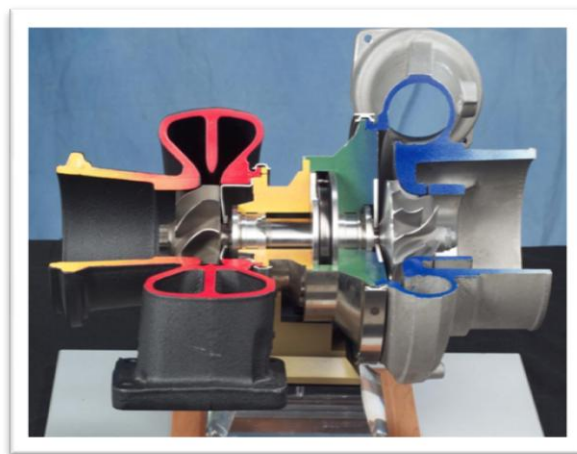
TURBOCHARGER CUTAWAY (COURTESY NASA/JPL-CALTECH)
